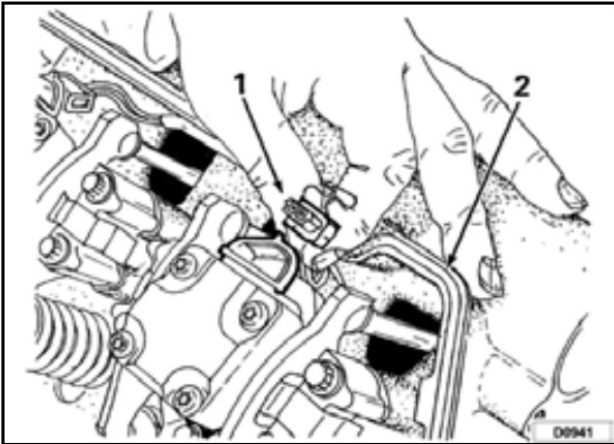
Connecting the Connector to the Fuel Injector Solenoid
